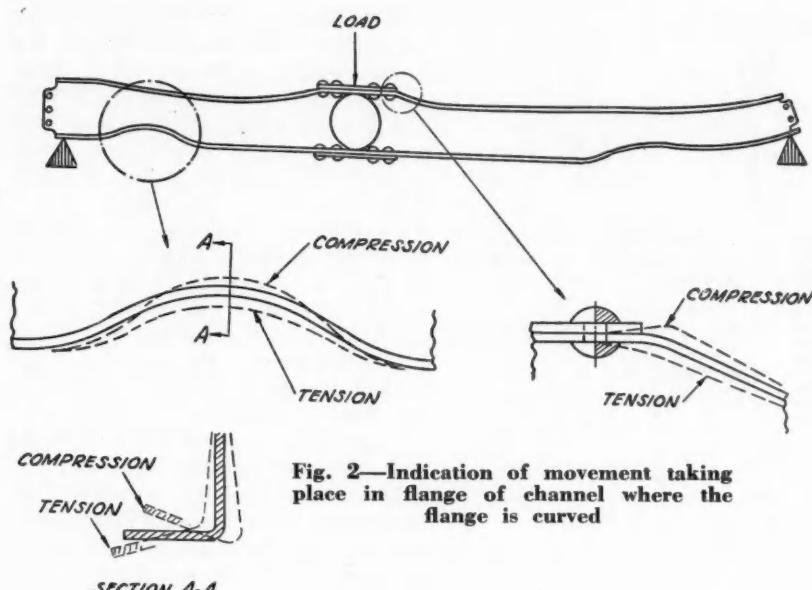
Indication of movement taking place in flange of channel where the flange is curved
